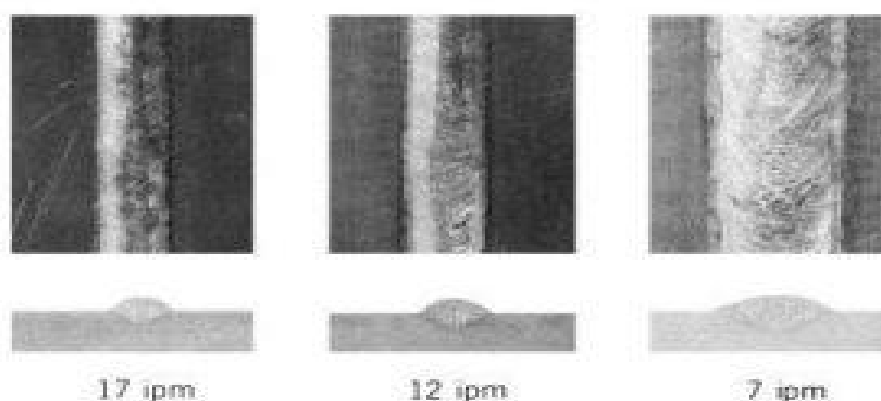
Effect of Welding Travel Speed on Weld Penetration Aluminium-Spray Arc-Argon Shielding
